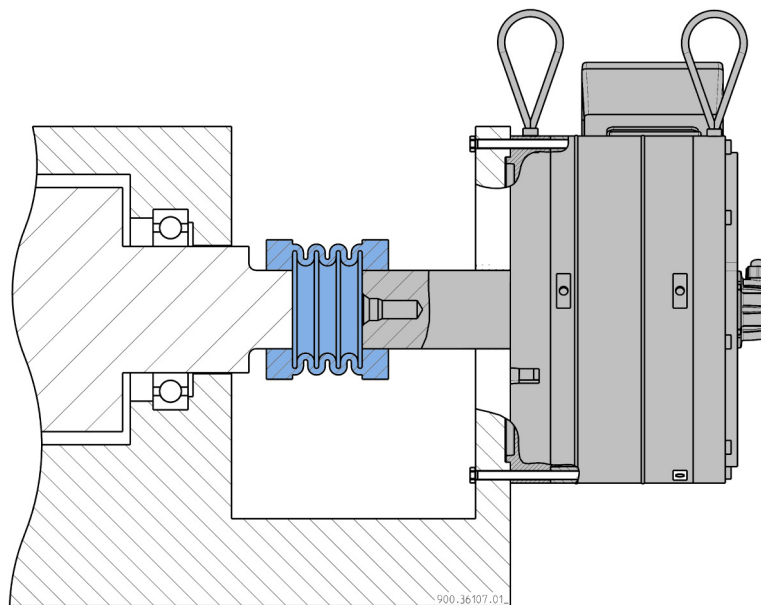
Decoupling the machine shaft from the motor shaft using a coupling
